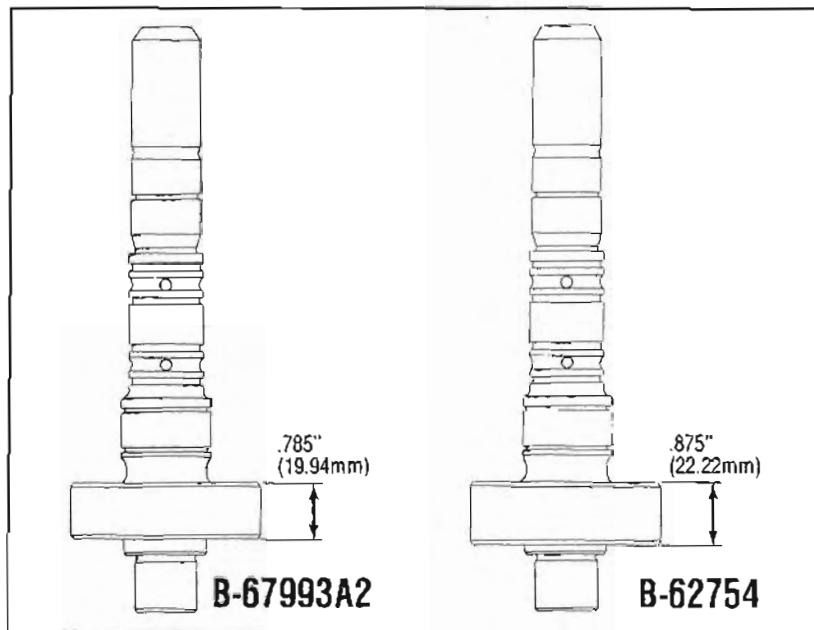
OUTPUT SHAFT IDENTIFICATION
